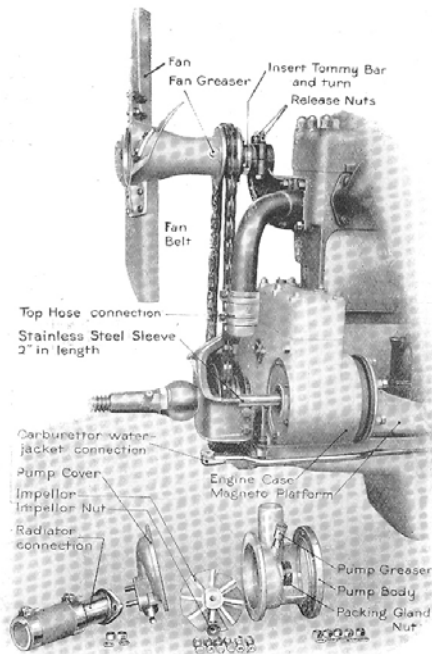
Showing Fan Belt Adjustment and Pump Assembly (350/450 Gallon Engine).
